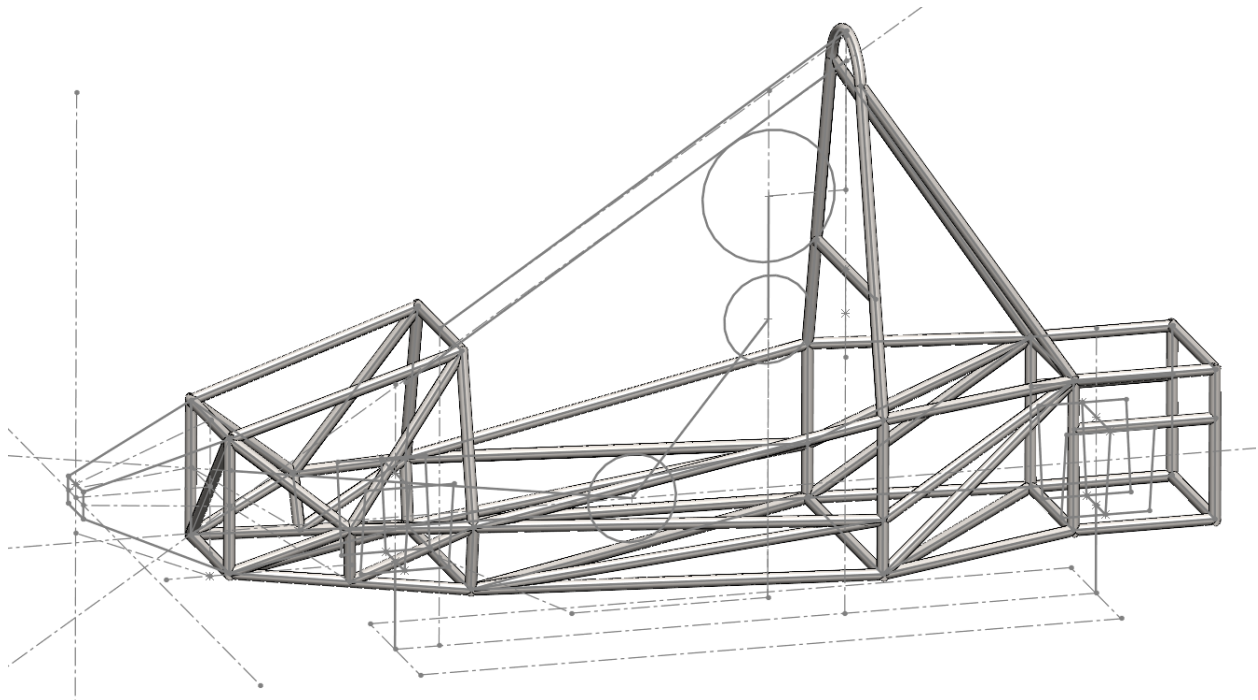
Chassis after insertion of custom weldments and corner treatments
